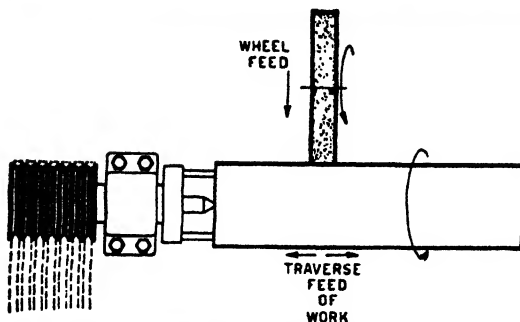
Work held between centers in cylindrical grinding. (*The Socony-Vacuum Oil Company*)
